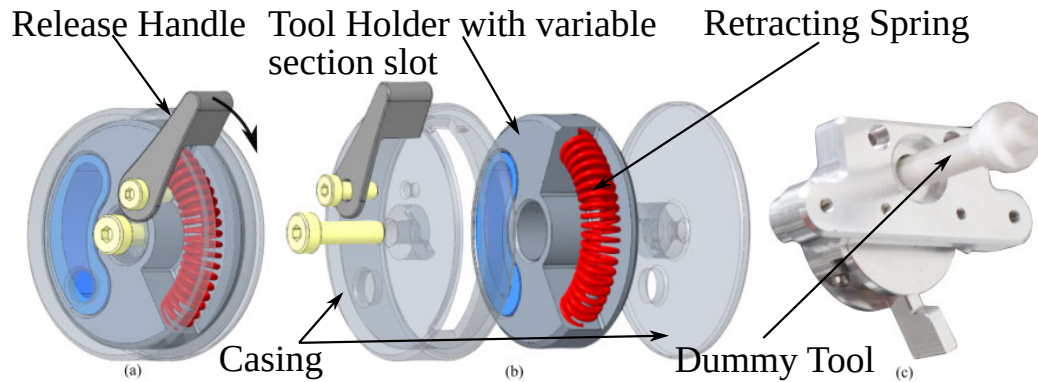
(a) CAD model (b) Exploded assembly of quick release mechanism (c) Actual mechanism
